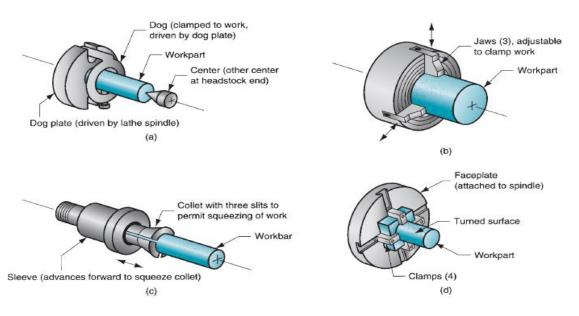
Four workholding methods used in lathes: (a) mounting the work between centers using a dog, (b) three-jaw chuck, (c) collet, and (d) faceplate for noncylindrical workparts.
